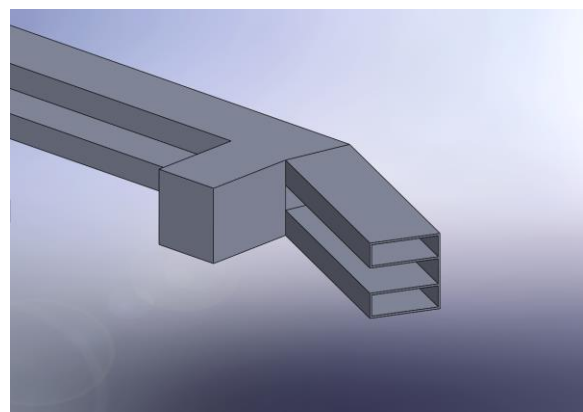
(c) Side view of Open B Sectioned Bumper Beam
